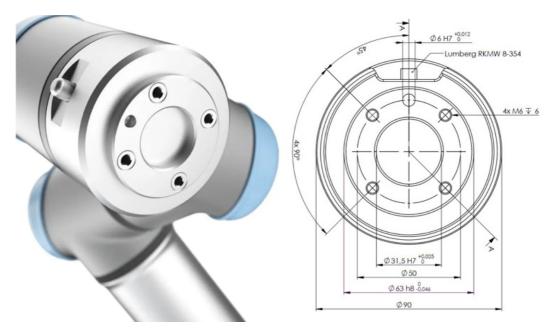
UR10e tool flange (a)[46] and its dimensions (b) [47]
